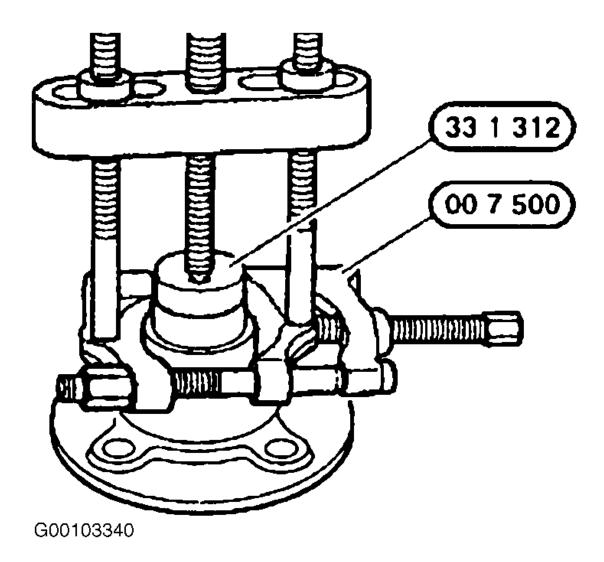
Pulling Off Bearing Inner Race Courtesy of BMW OF NORTH AMERICA, INC.
